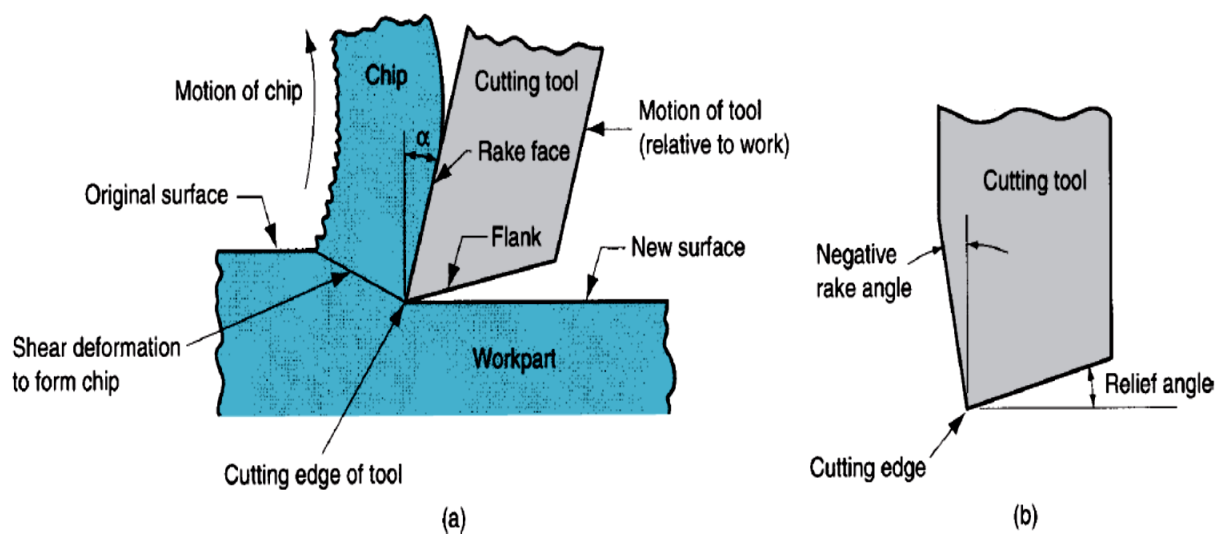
(a) a cross-sectional view of the machining process (b) tool with negative rake angle compare with positive rake angle in (a).
